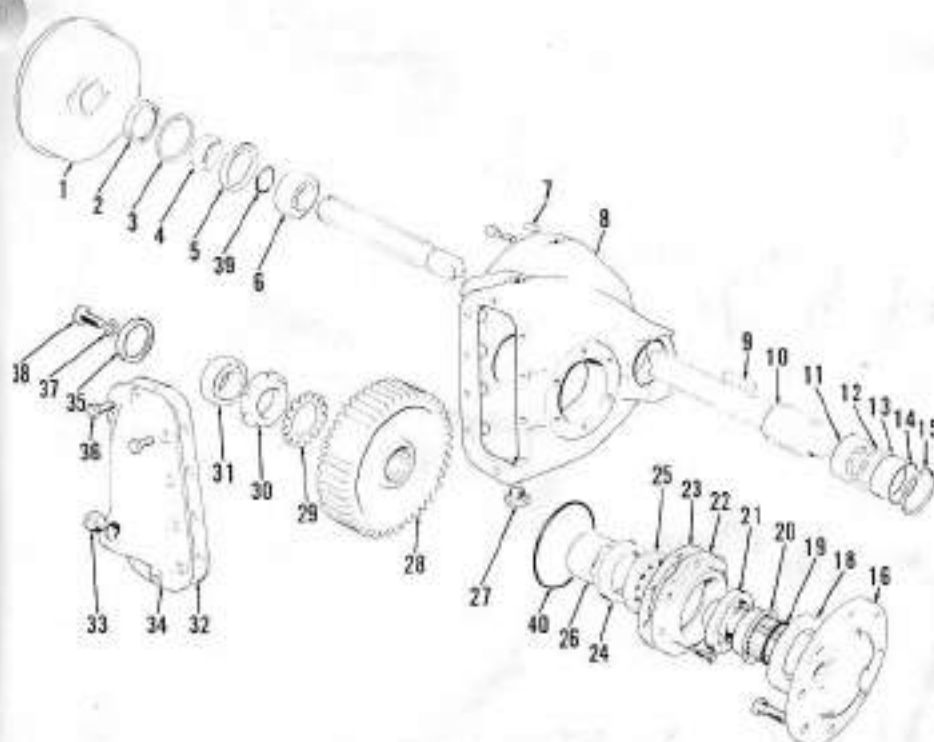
Exploded view of final drive assembly typical of type used on 995, 1210 and 1212. Except for parts (35, 37 & 38) 995 models are similar. Axle bearings (25 & 31) are adjusted by shims (23) on 995 models. Axle bearings are adjusted on 1210 and 1212 models by shims (37) under screw (38) which changes setting of thrust plate (35). Gasket is located at (23) and "O" ring (40) is not used on 1210 and 1212 models. Refer to Fig. 132 for legend except the following.
